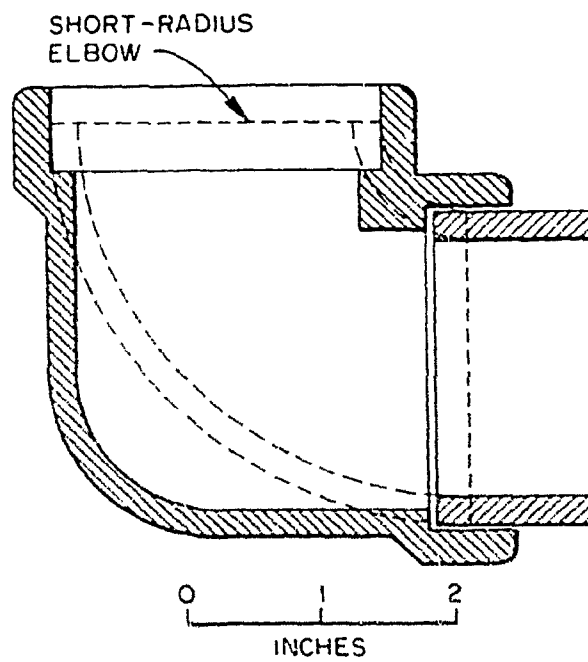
ANSI B16.11 90° elbow, 2-in., 3000-lb-class, sched-80 pipe.
